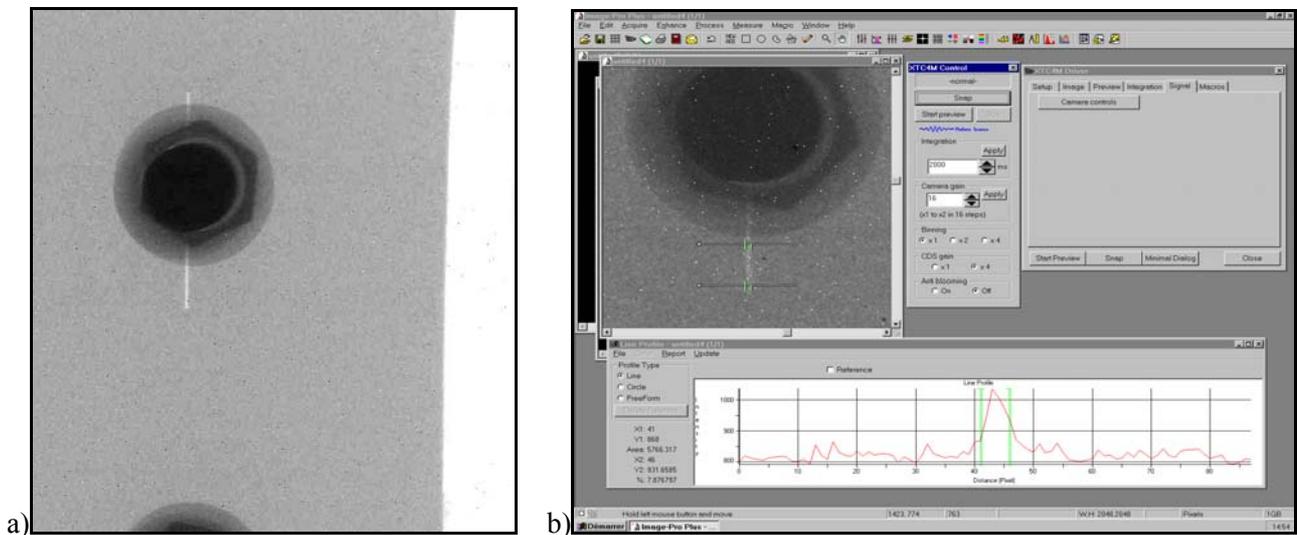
a) X-ray image of crack under rivet. B) User interface with measuring tool.
